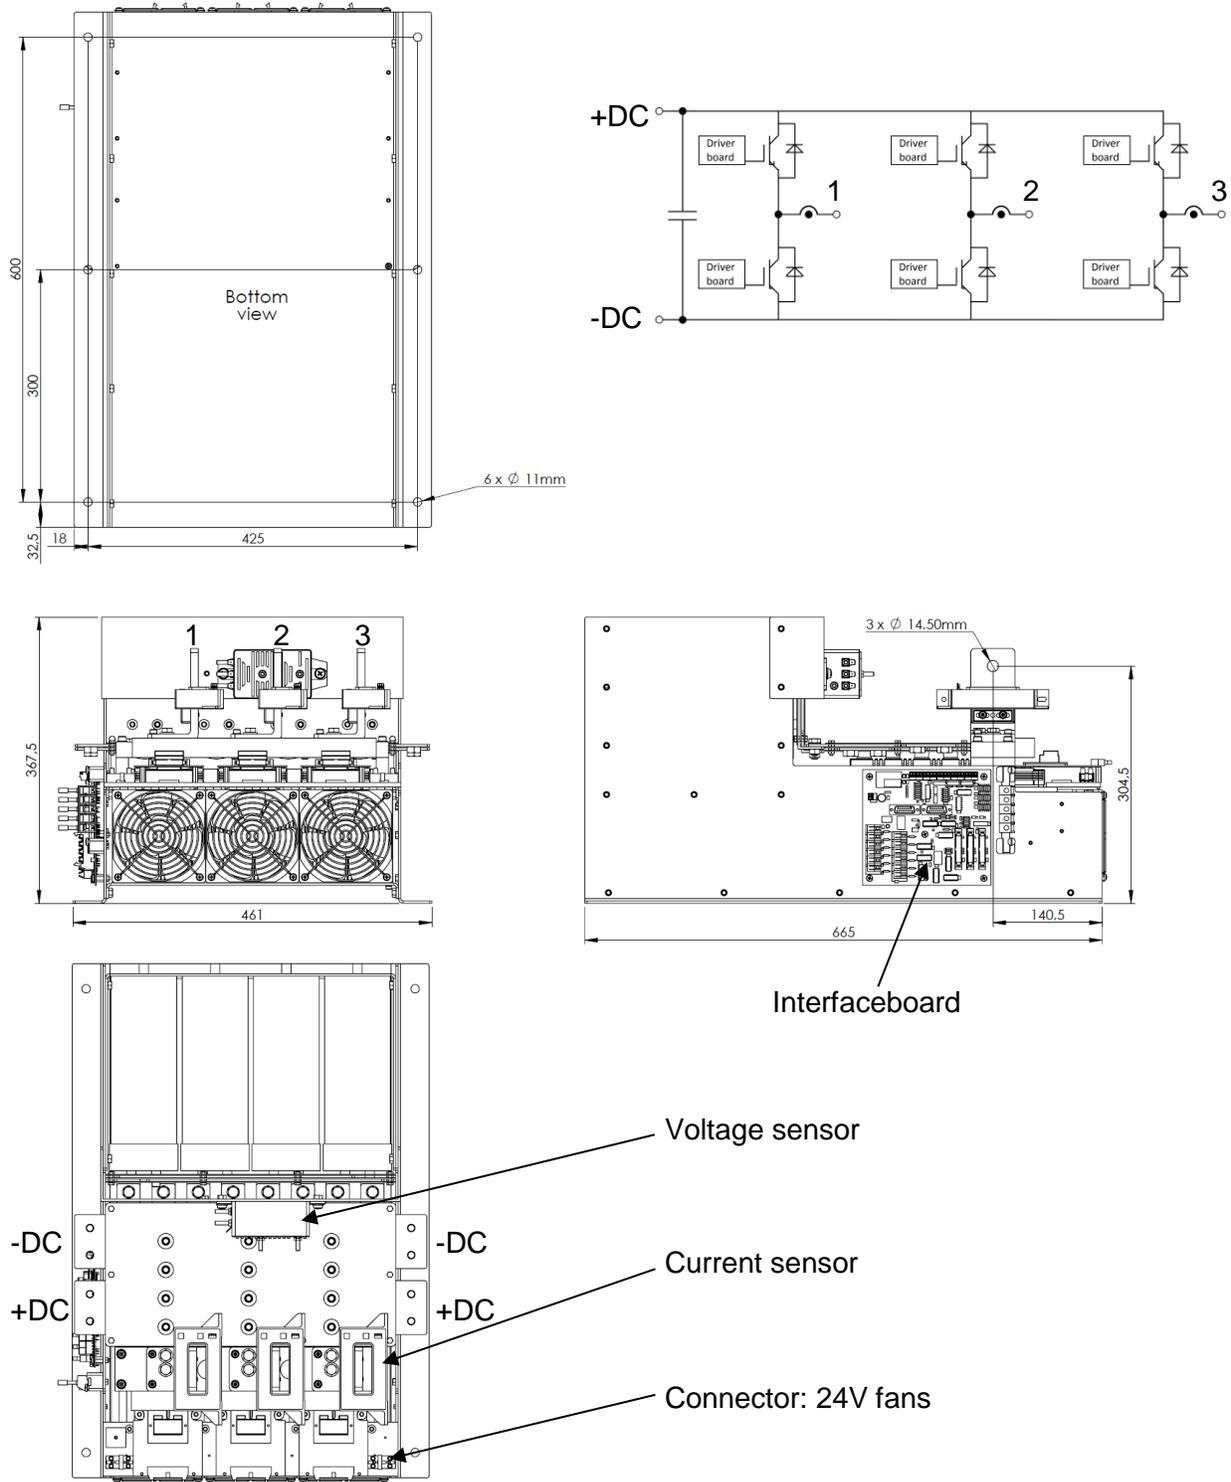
Mechanical drawing of the VARIS™ XT Compact-14-17-A (air cooled)
